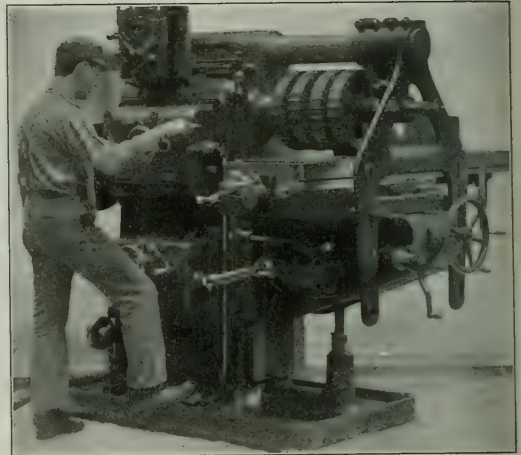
View Showing Position of Operator and Convenience of Adjustments.
